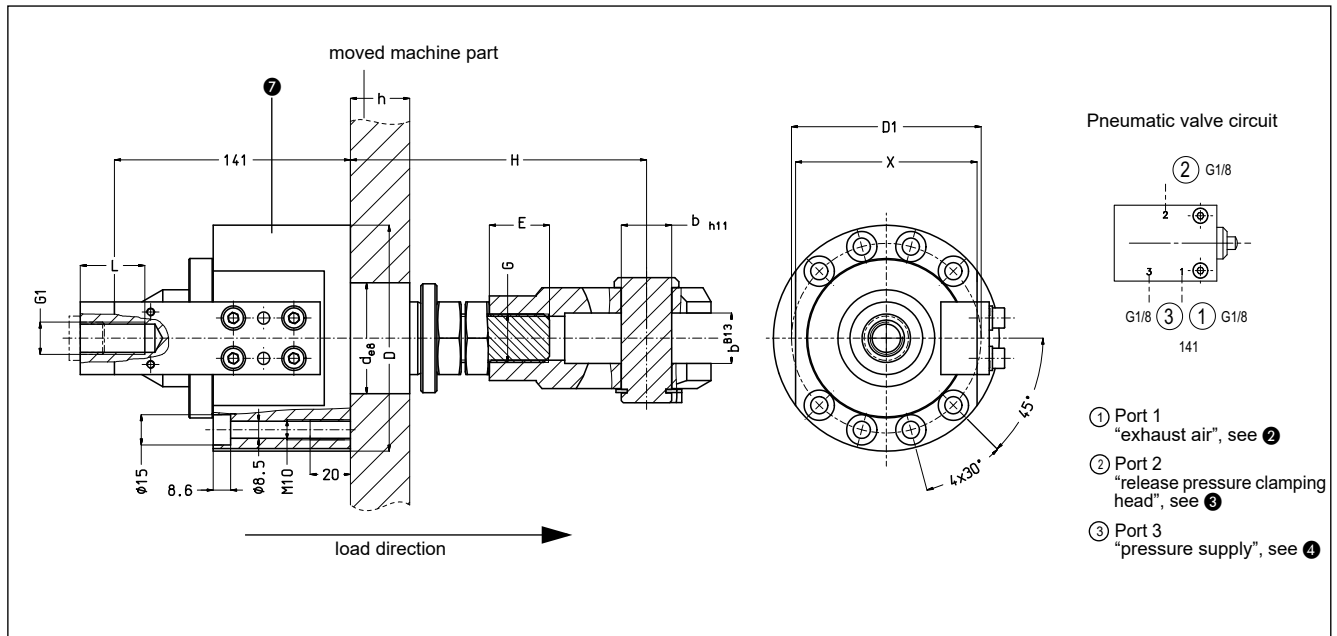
Dimensions of Mechanical Valve Actuator MVA
